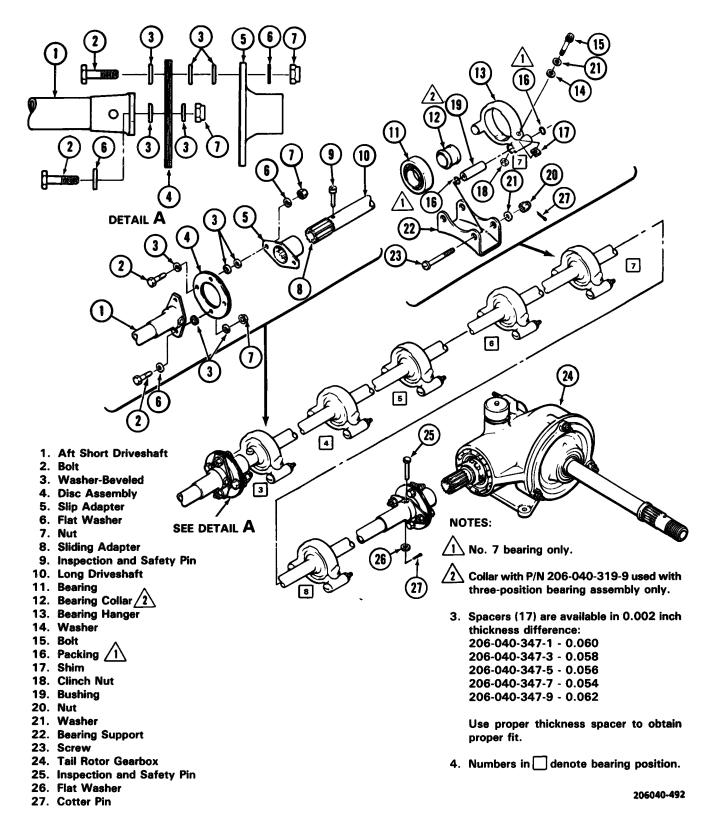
Long Driveshaft Installation — Tail Rotor (Hard Type)
